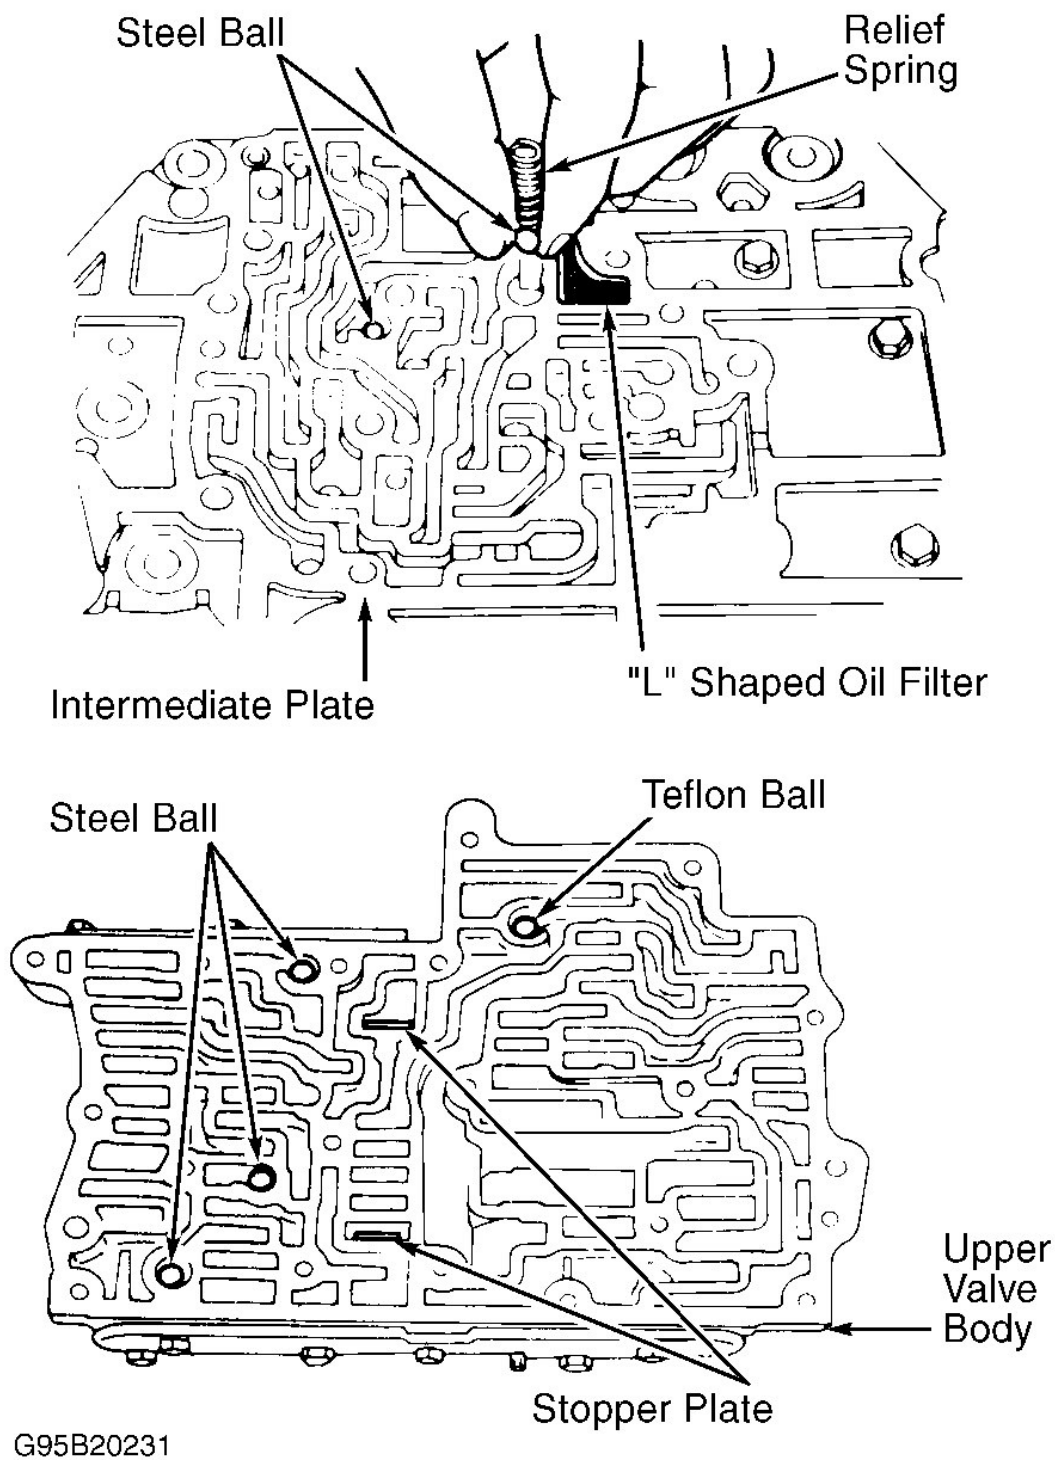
Identifying Relief Spring, Steel Balls, Teflon Ball, "L" Shaped Oil Filter & Stopper Plate Locations
